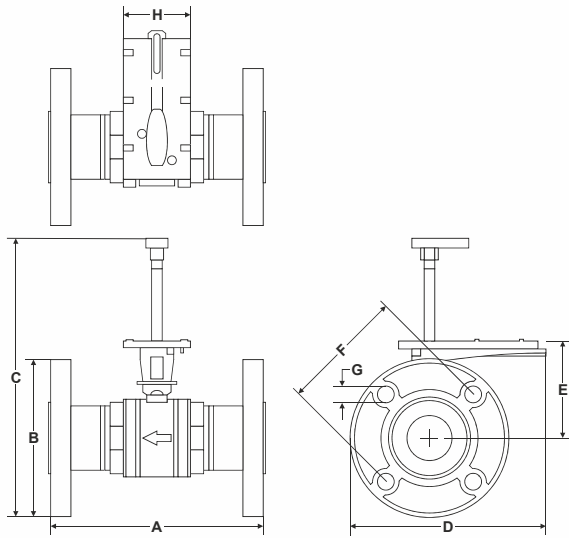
Two-way DN 50 ... 80 valve dimensions
